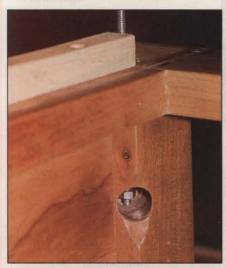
Photo A: Threaded rods hold the four case corners together. Each rod passes through the upper leg and divider frame and fastens to a nut and washer recessed in the lower leg.
